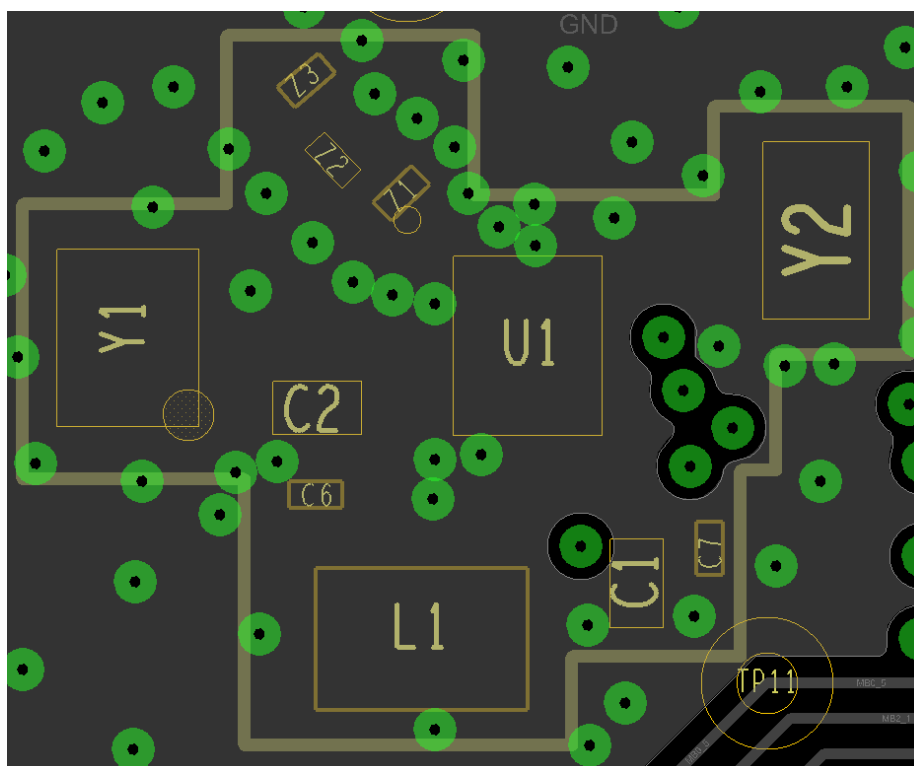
WLCSP17 PCB Placement and Routing – Bottom Layer
